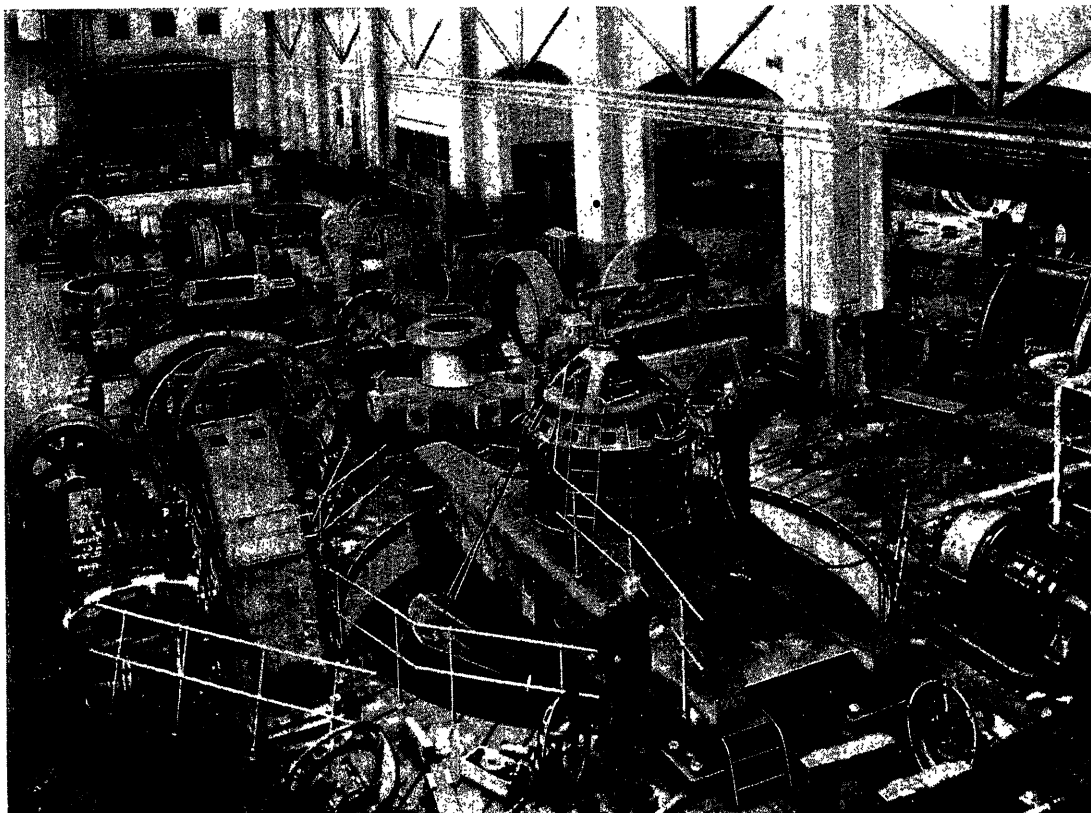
Preparing for run-away test. Rotor parts assembled in test pit on vertical shaft.
